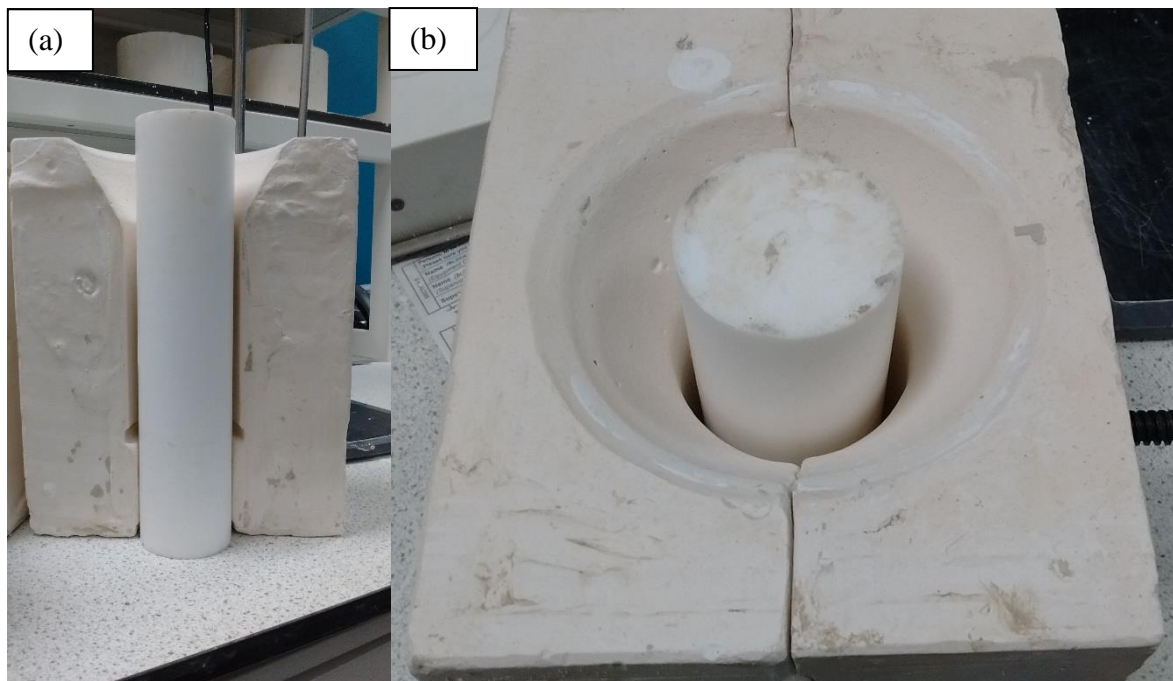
Mould for slip casting of 5mm cylinder
